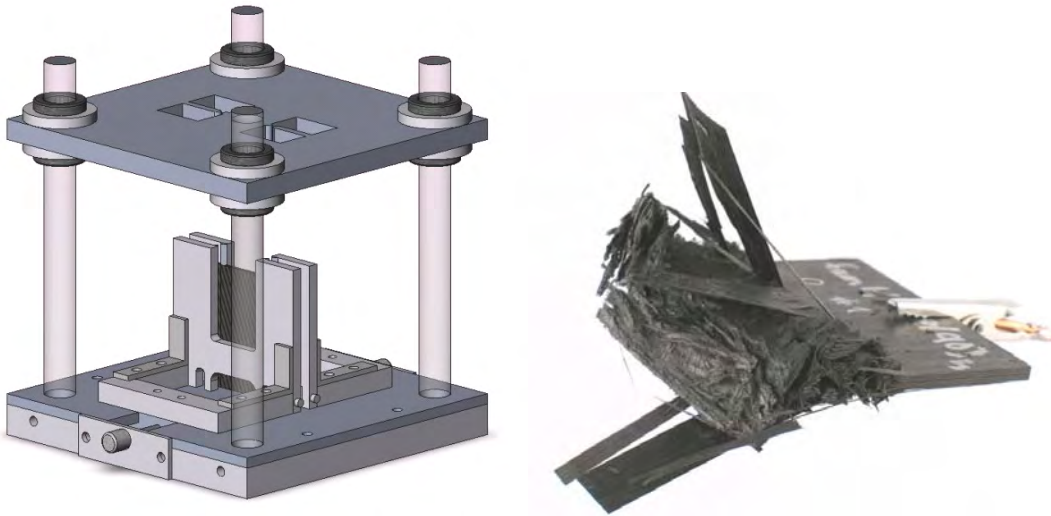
Flat plate specimen in the specialized test fixture, and close-up after crushing.
